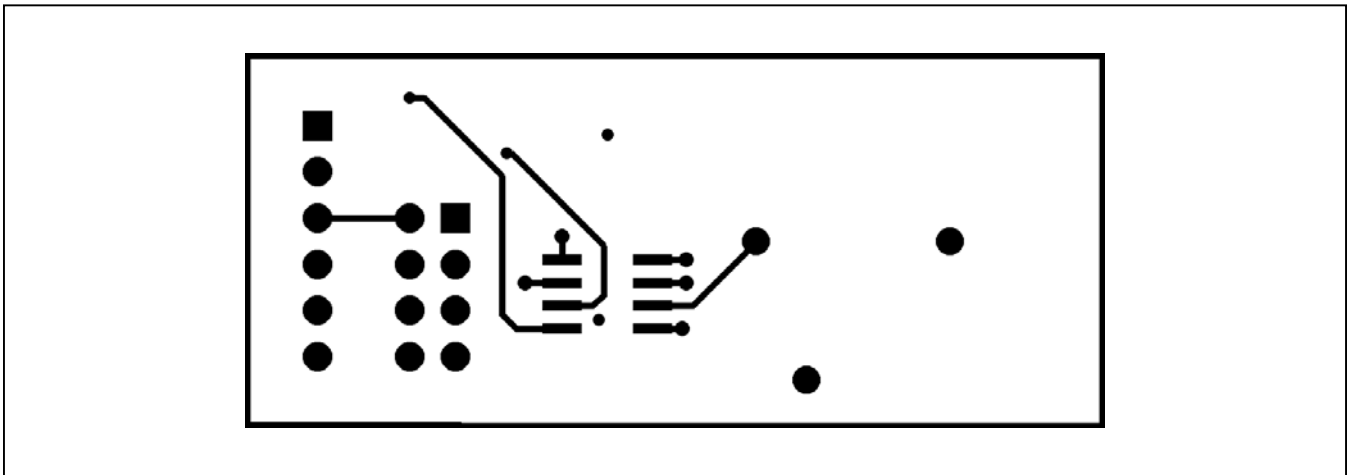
DS3231MPMB1 Peripheral Module PCB Layout—Component Side
